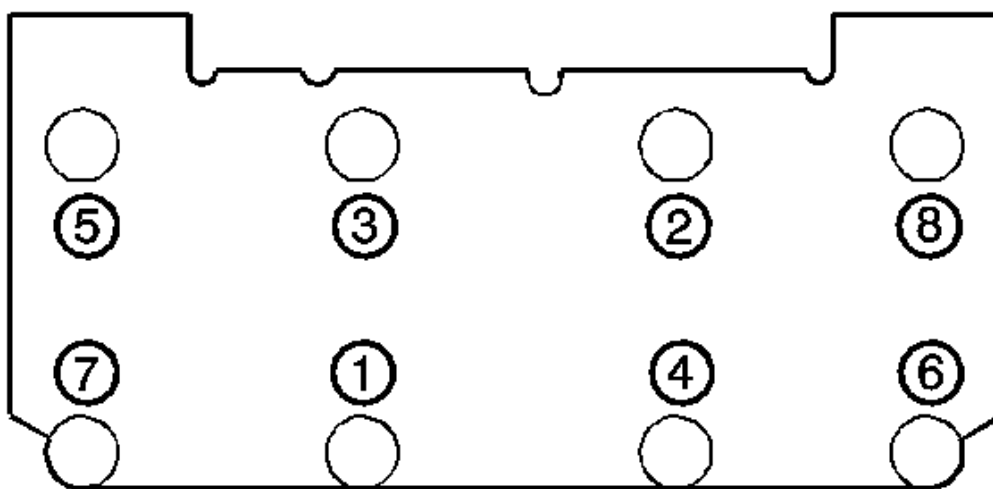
View Of Cylinder Head Bolt Tightening Sequence
